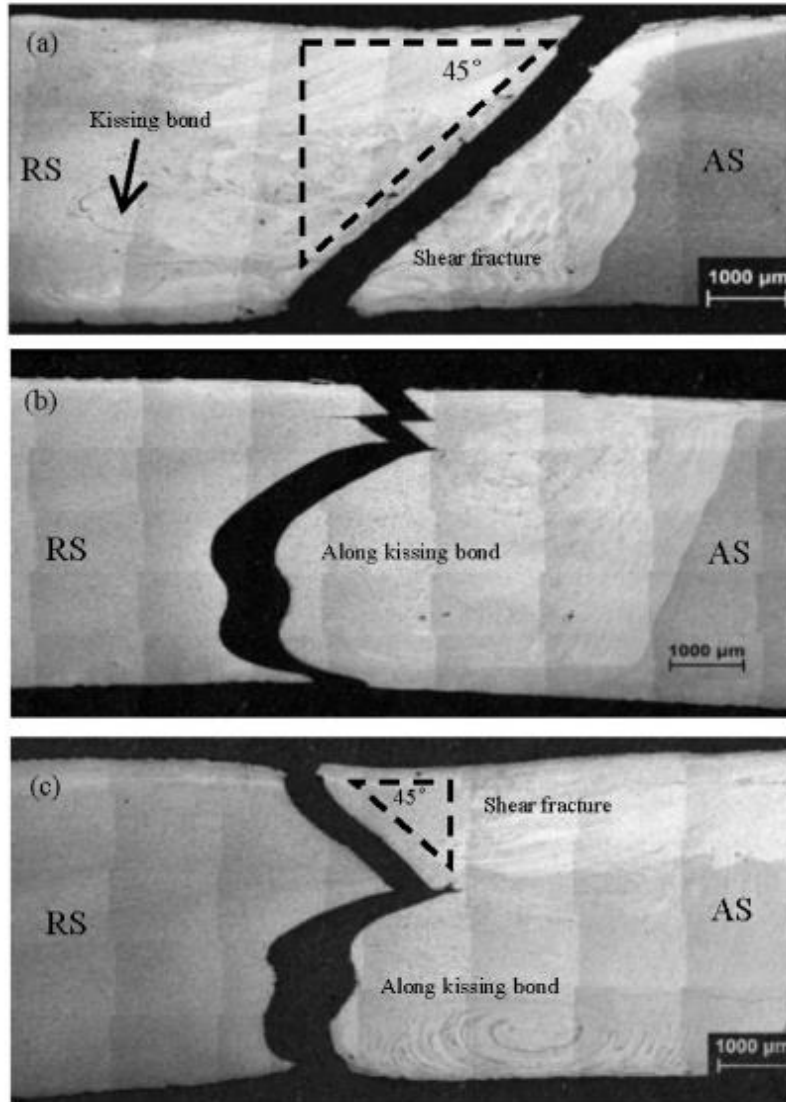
23 Macrostructure profiles of the fracture of AA5083-H112 FSW joints.
